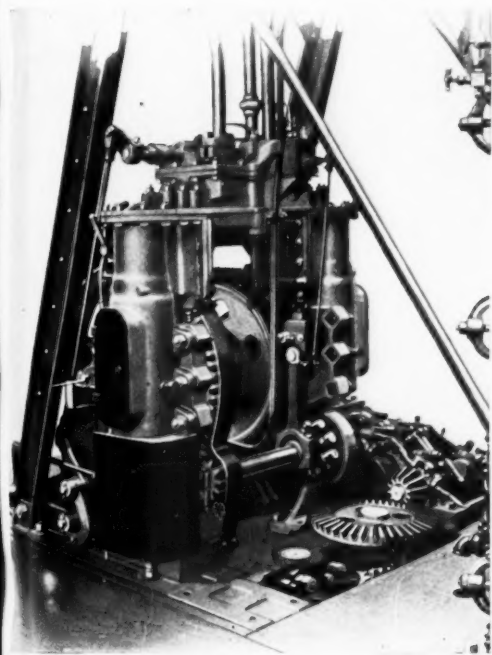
Details of Construction of a Caterpillar Type Unit viewed from underneath. Relation of gearing is clearly shown.
